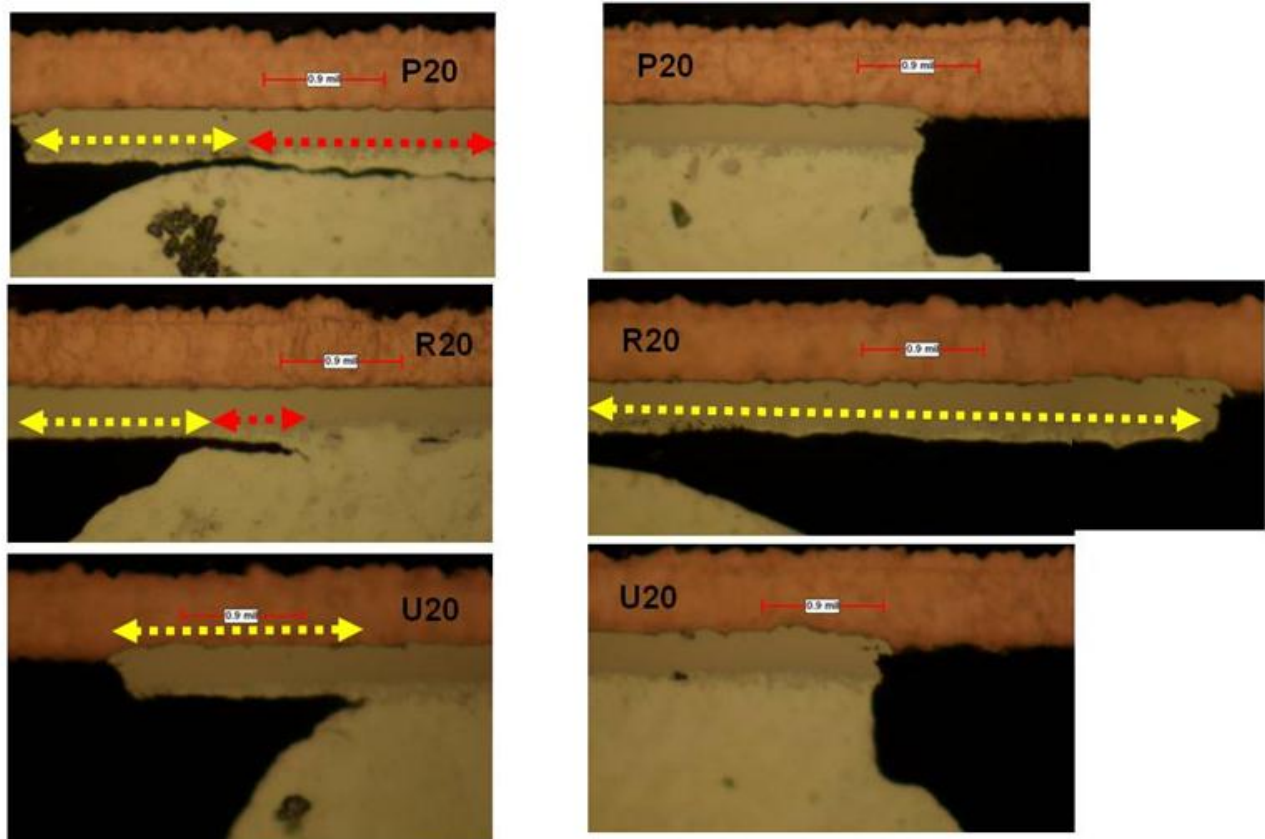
Magnified cross section, 1000X, of PCBA, Component A, solder balls P-20, R-20, and U-20.
